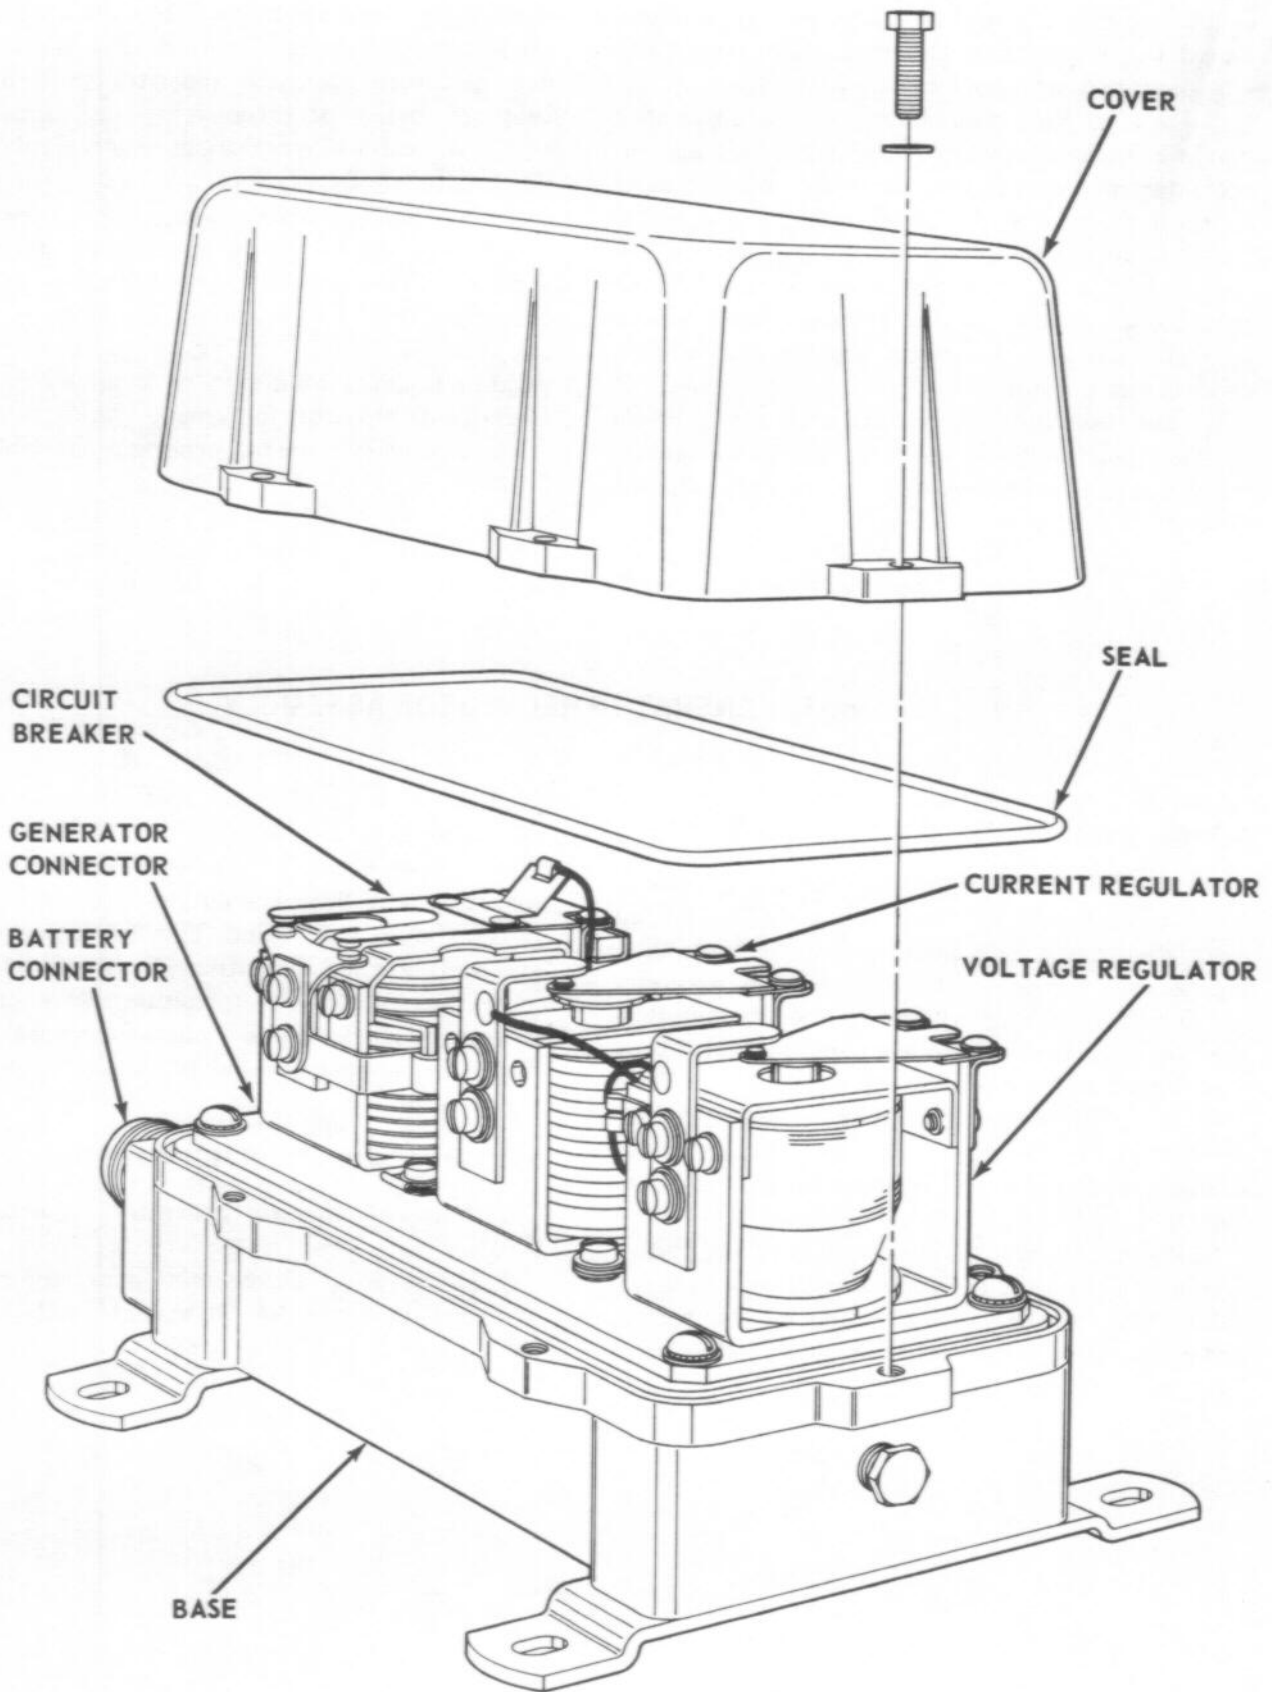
Generator regulator assembly; disassembly and reassembly.
